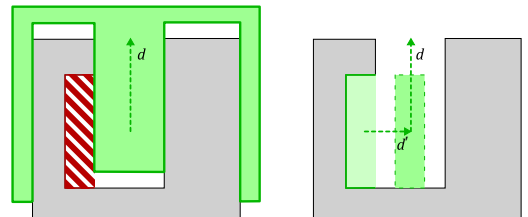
While the red highlighted area (left) would locally be a height-field with respect to d' (C2.1), there is no global mold decomposition that would admit a linear assembly (C2.2). Allowing for a piece-wise linear assembly sequence would make such decomposition valid; at the cost of a greater computational and fabrication machinery complexity.
